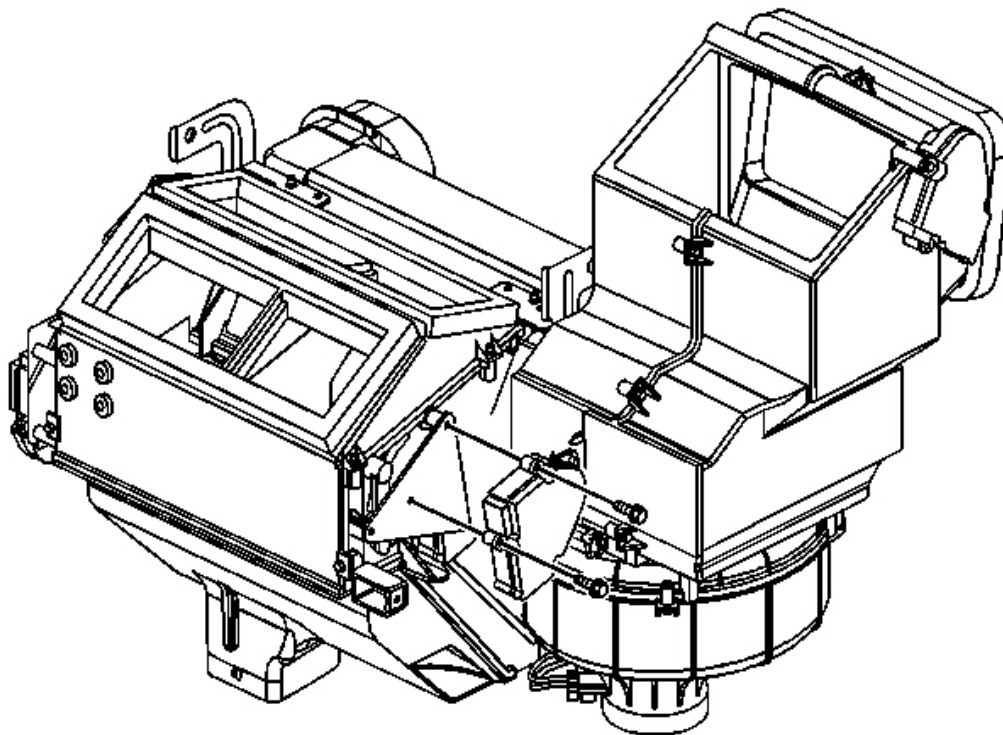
View Of HVAC Module, Air Temperature Actuator & Retaining Screws
